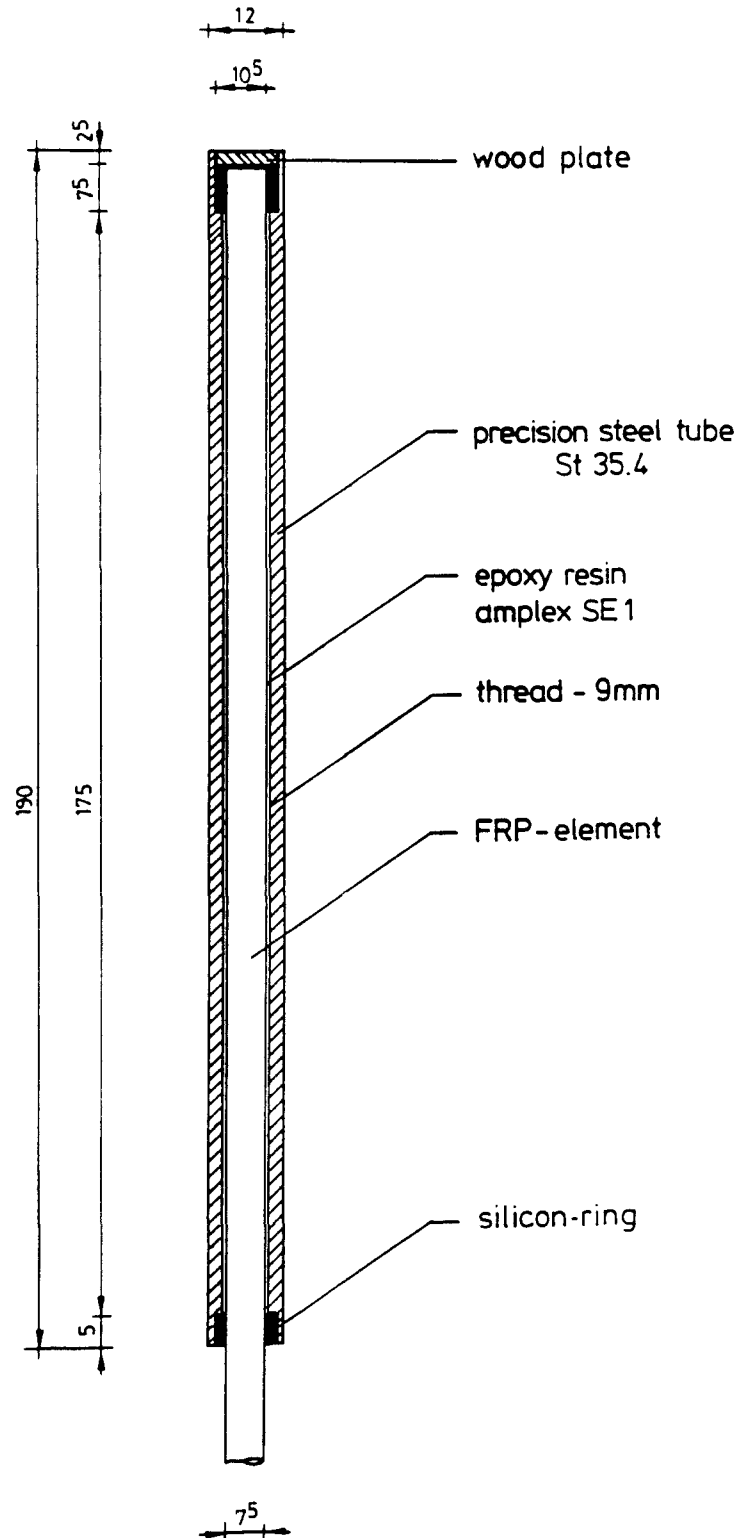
Steel Tube for Protection and Gripping of Specimen
